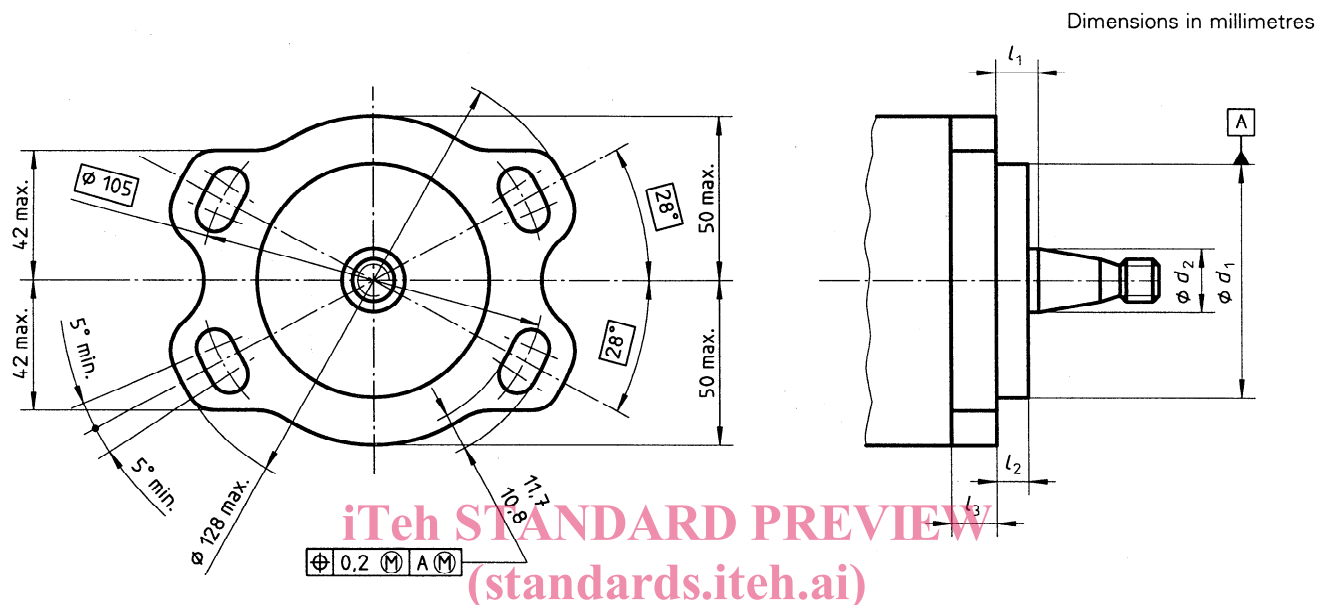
Rotary and distributor fuel injection pumps — Type 3 end-mounting flange
